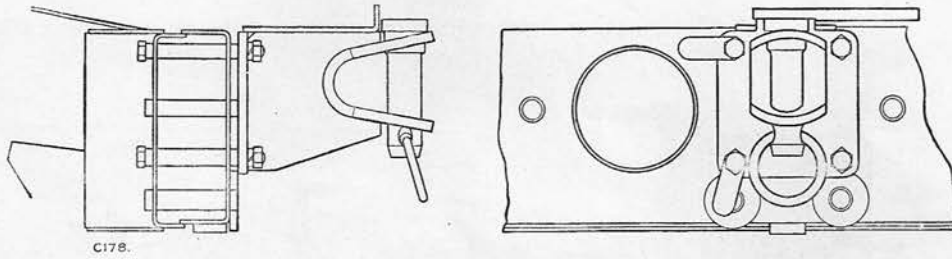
Heavy duty towing jaw Part No. 242493. This towing jaw can be fitted only to chassis frame.
